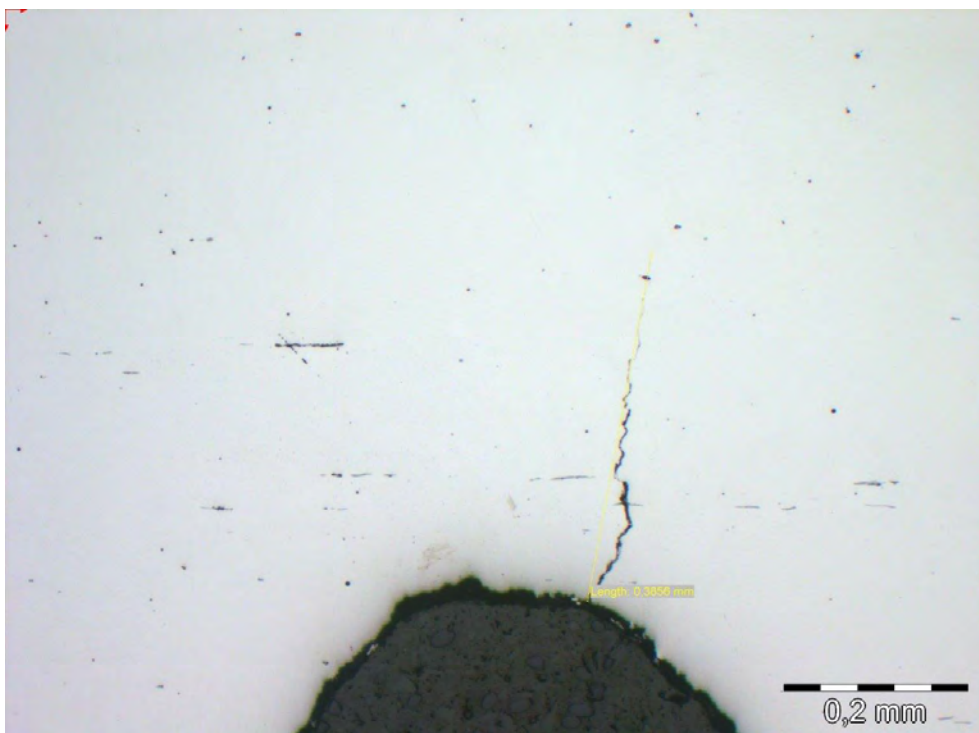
Crack at segment C, second ridge on barrel no. 1613
